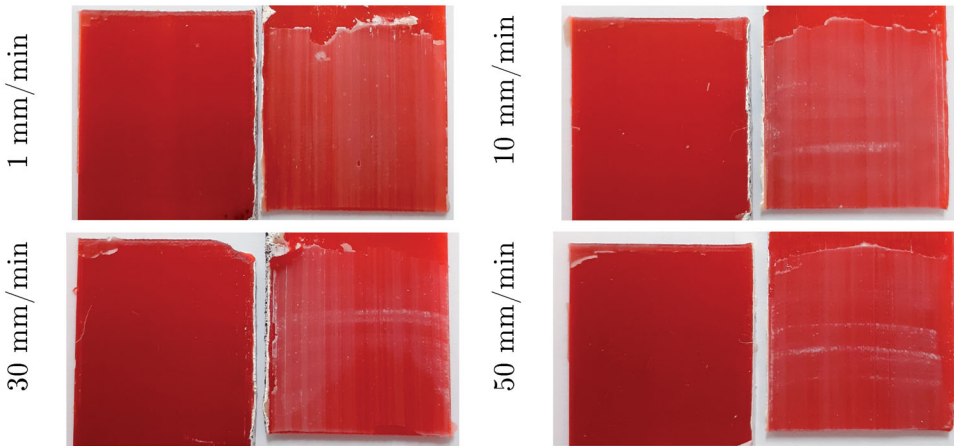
Fracture surfaces of 3D-printed PLA adhesive single-lap joints after three-point bending tests at different loading rates.
